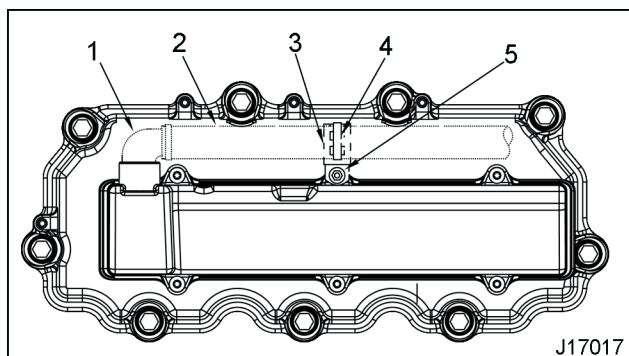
Crankcase Ventilation Hose Assembly Mounting
